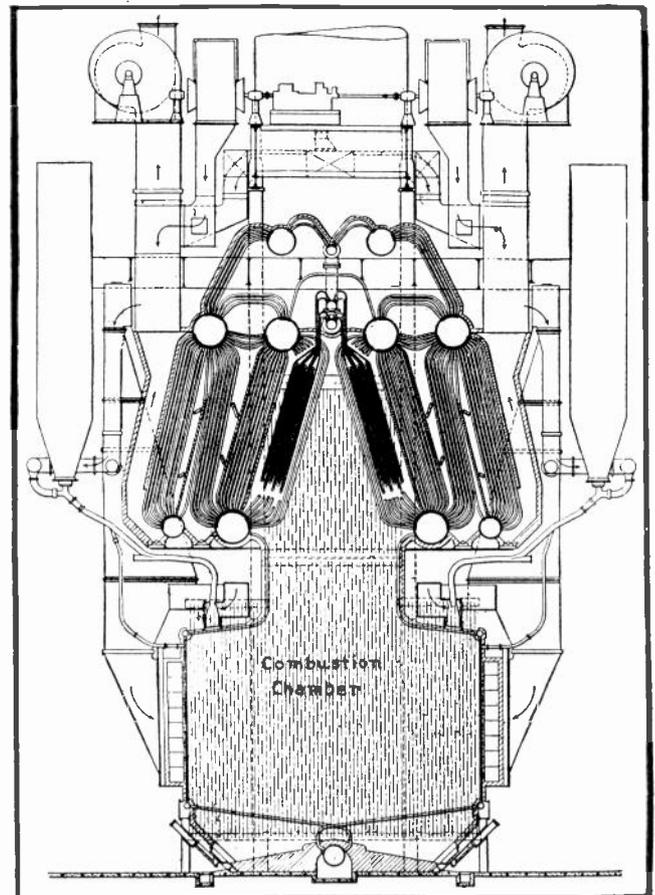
Another type of large modern power plant boiler showing the combustion chamber, boiler tubes, super-heater, draft fans, etc.
